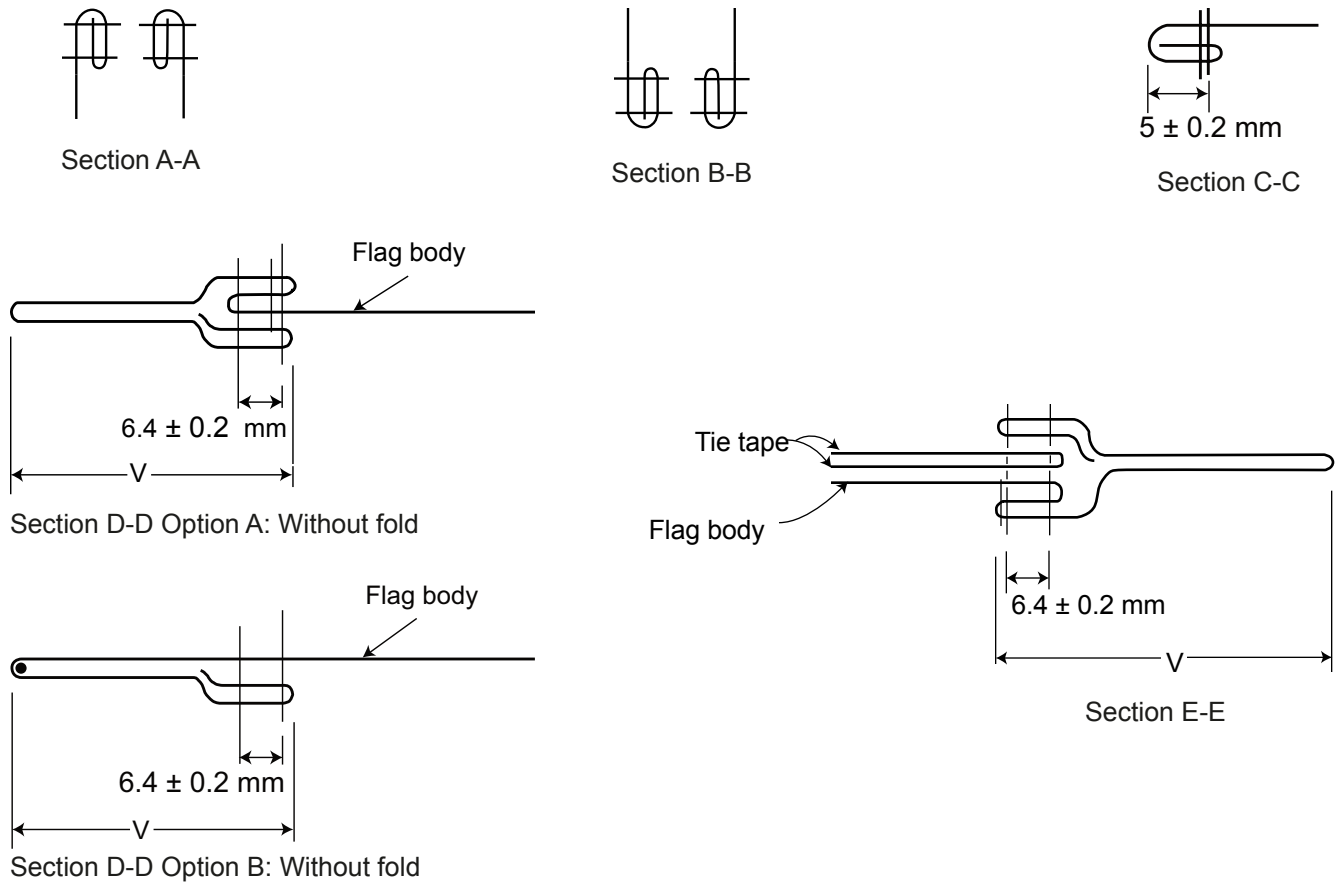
Construction details — Subtypes 1A and 2A flags – Integral header
